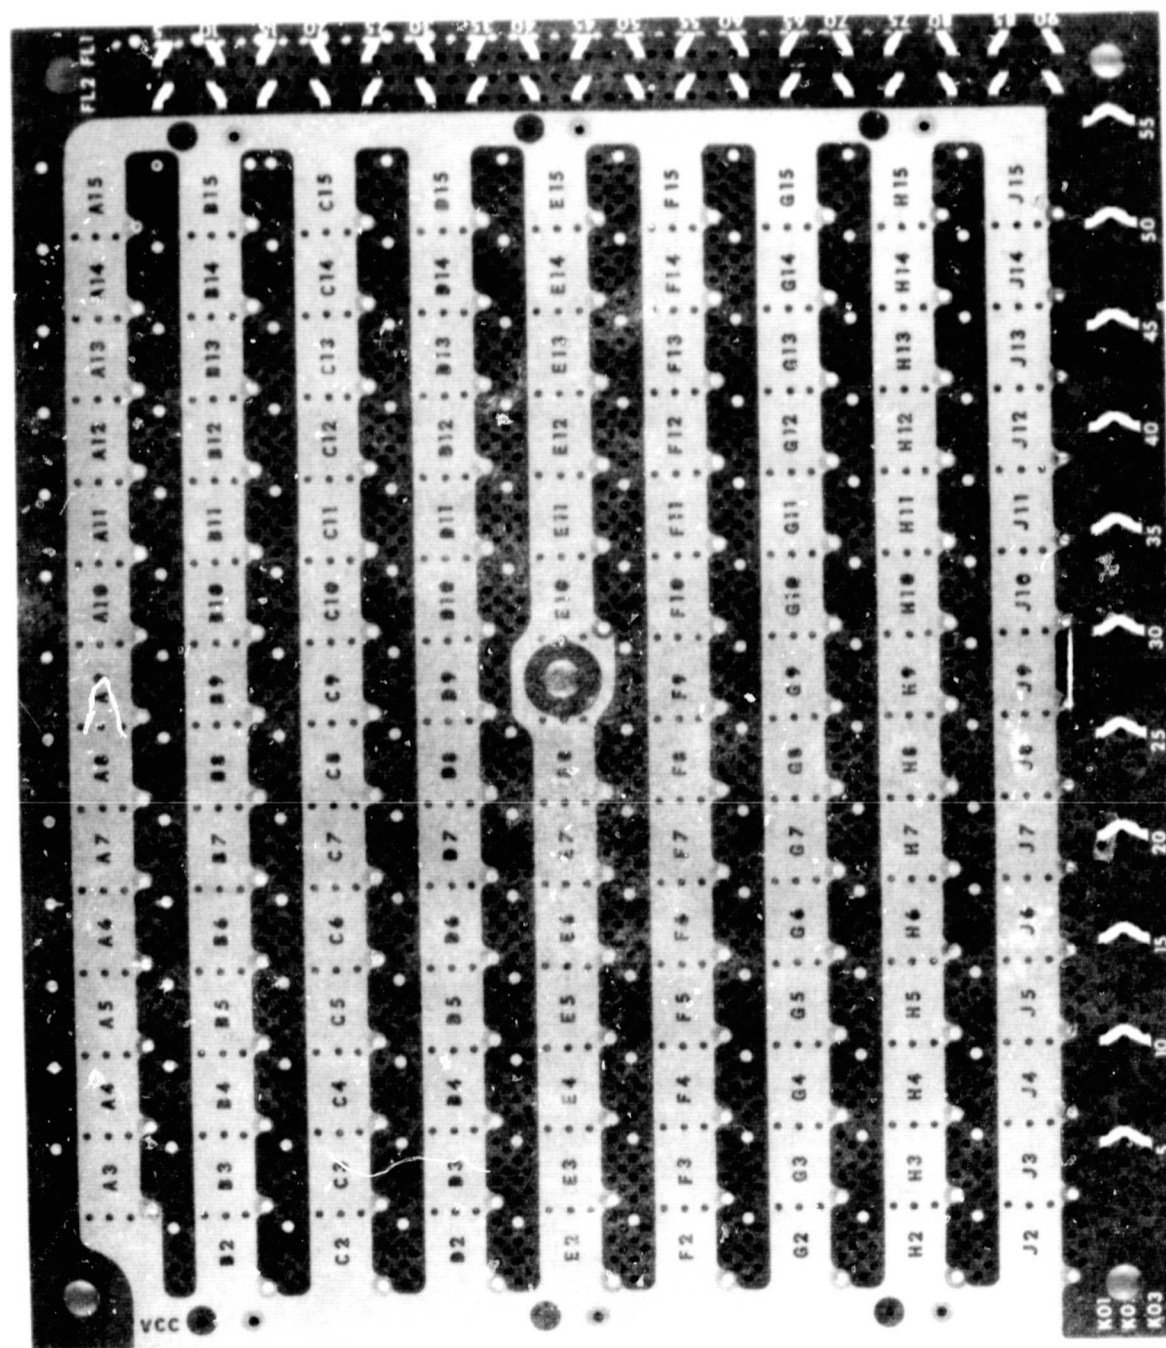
Wiring Side of a Typical Board With Etched Power Plane
